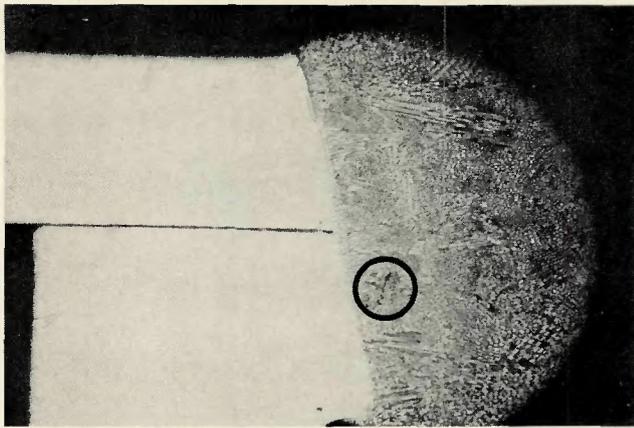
Typical defect is Hastelloy C-276 weld; oxalic acid etch; 70X
